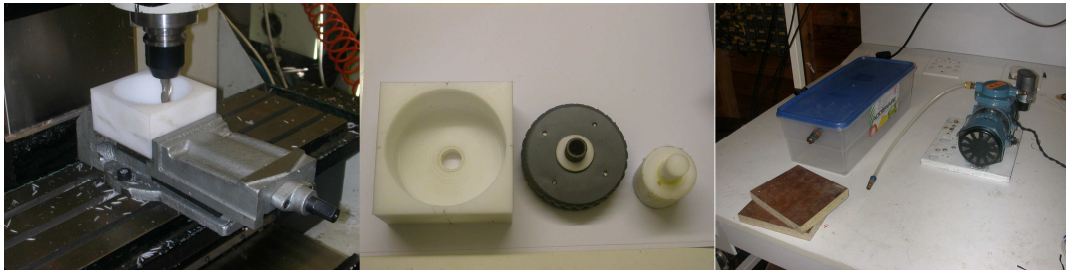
MACHINING THE MOLDS (LEFT), THE MOLD ASSEMBLY (CENTRE) AND THE VACUUM SETUP (RIGHT)
